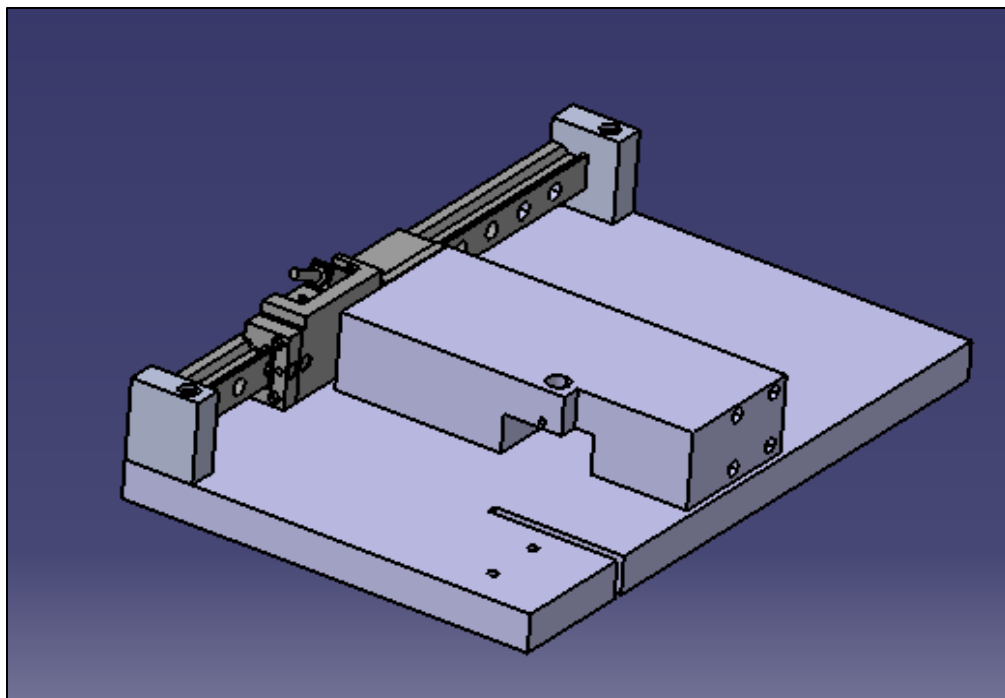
Cutting table, sliding base, and linear rail assembly (rail from [2])
